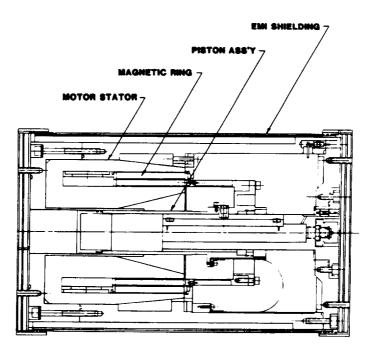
Layout drawing of piston/motor section with piston at mid-stroke.
